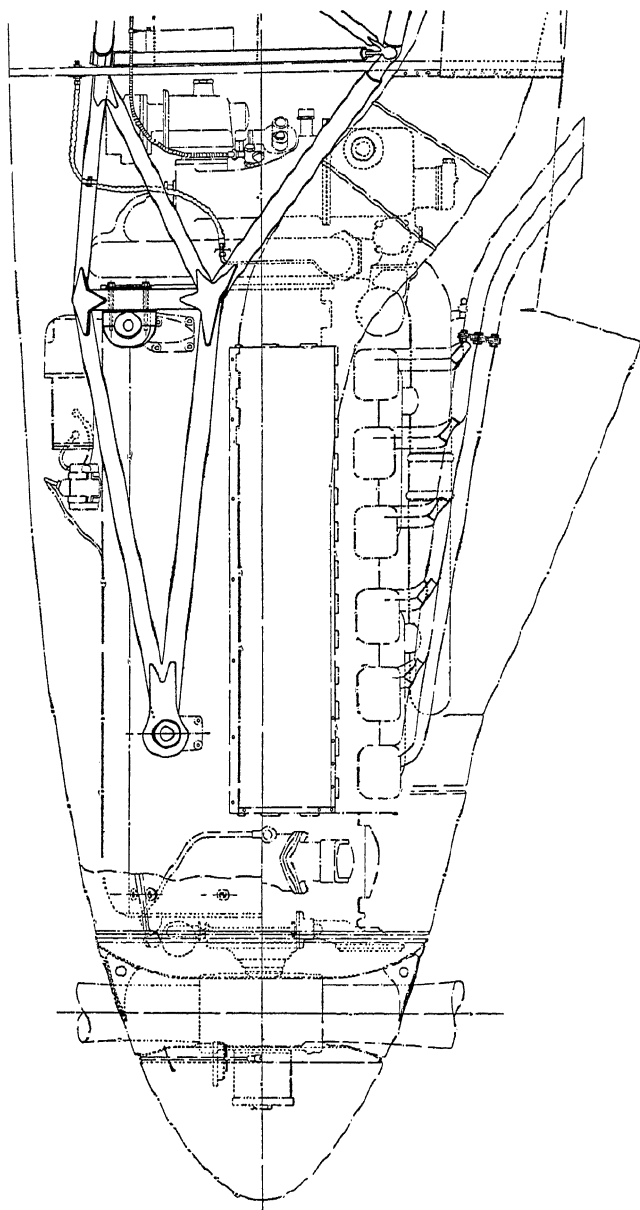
Side view showing typical installation of Gipsy Twelve engine in aircraft.
